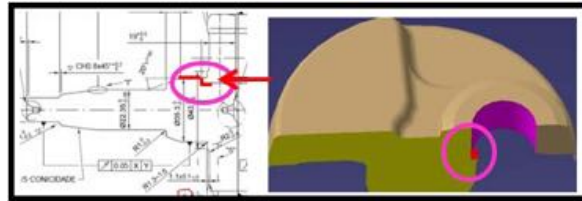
Crankshaft cut design. Axle shoulder area blocking complete trunnion hole conformation.
